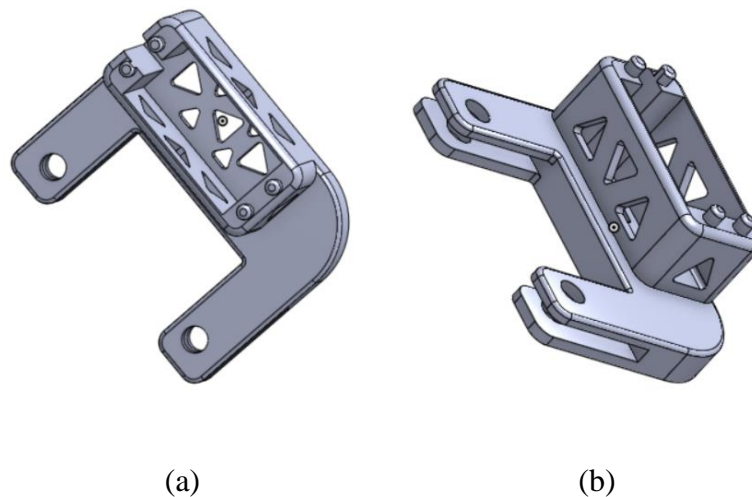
Picture of the motor housing. (a)Top View (b) Isometric View
